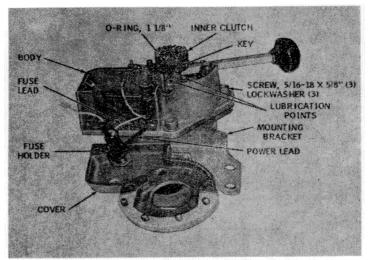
Shift Tower Assembly with Inner Clutch Exposed
